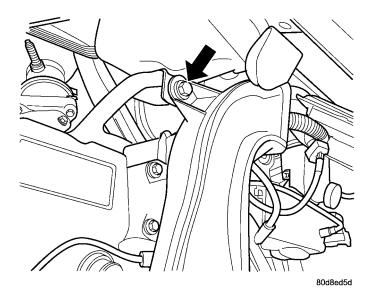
REAR STRUT BOLTS UPPER INTAKE
